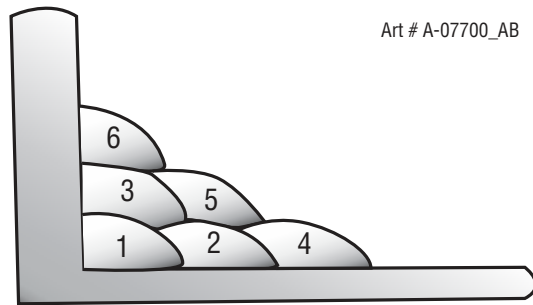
Multi-runs in HV Fillet Weld
